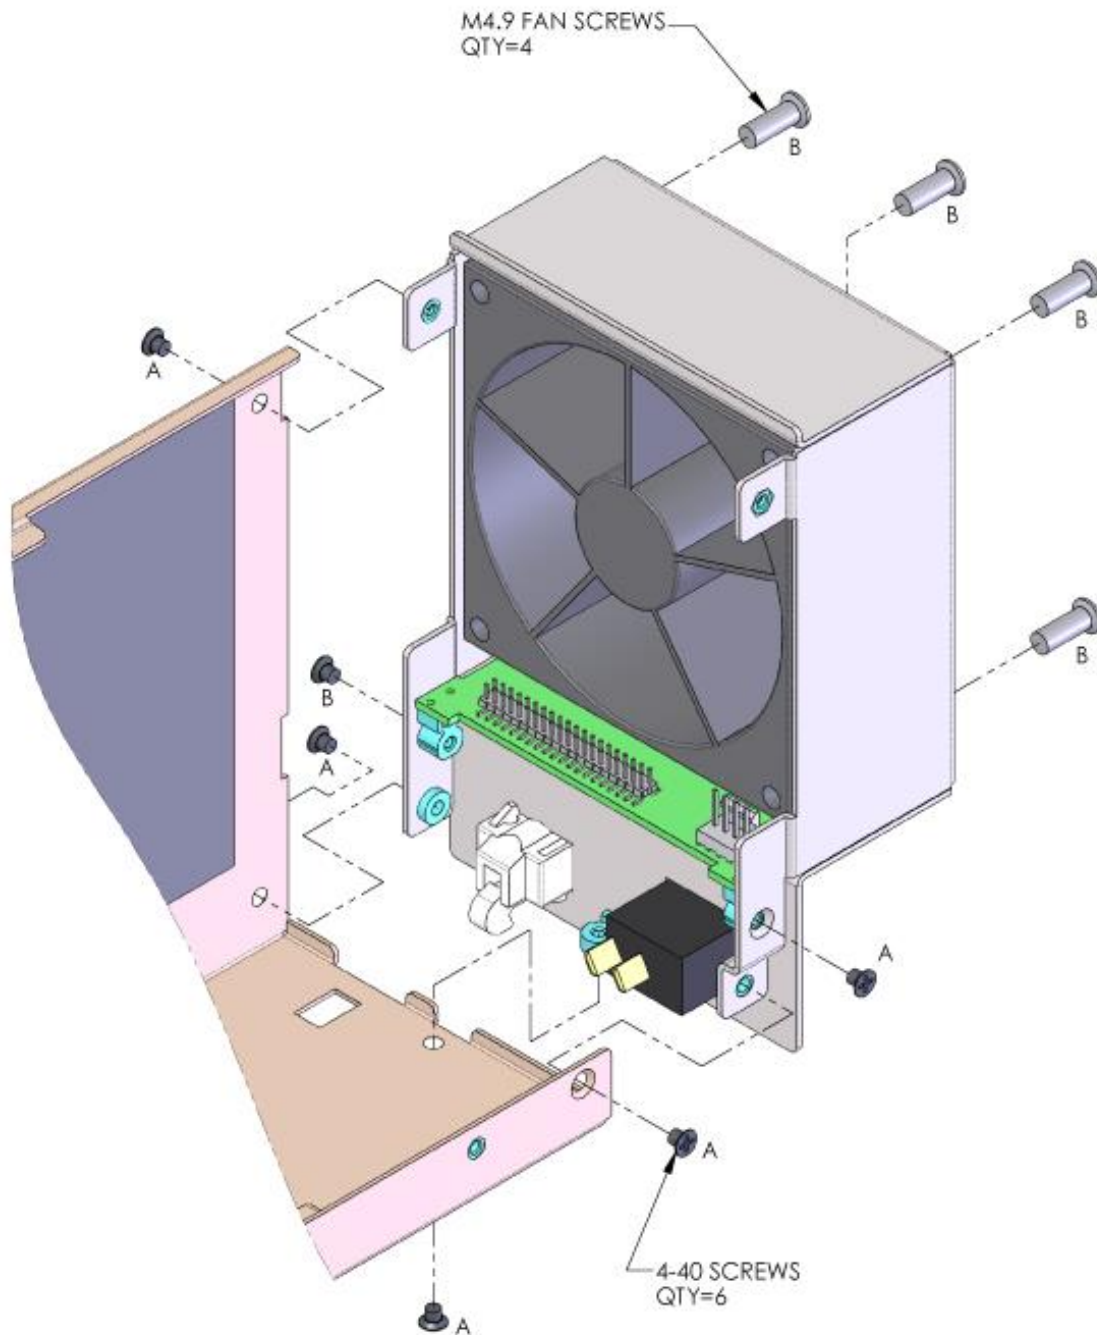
Removing the Front Fan Enclosure: The diagram shows the location of the 10 screws that need to be removed in order to replace the front fan. Label A indicates screws that need to be removed to detach the fan enclosure from the canister. Label B indicates screws that need to be removed to remove the fan from the enclosure.
